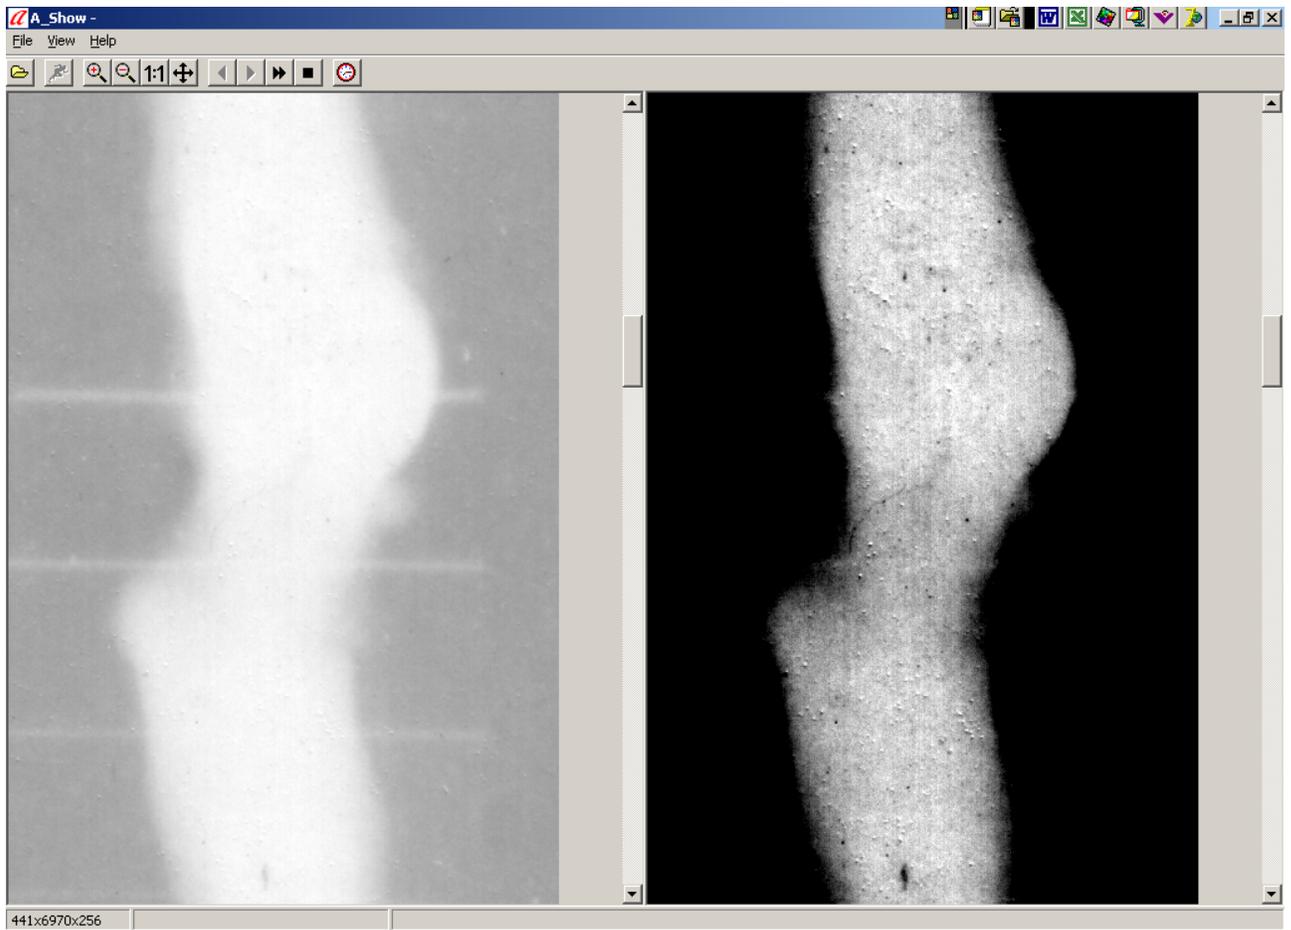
Welded seam with crack before processing (left) and after processing (right).
